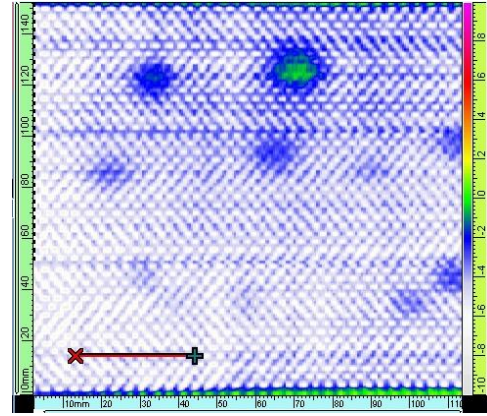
C-SCAN OF DAMAGED HONEYCOMB ARRAY THROUGH A 0.76 MM THICK CFRP FACE-SHEET.
